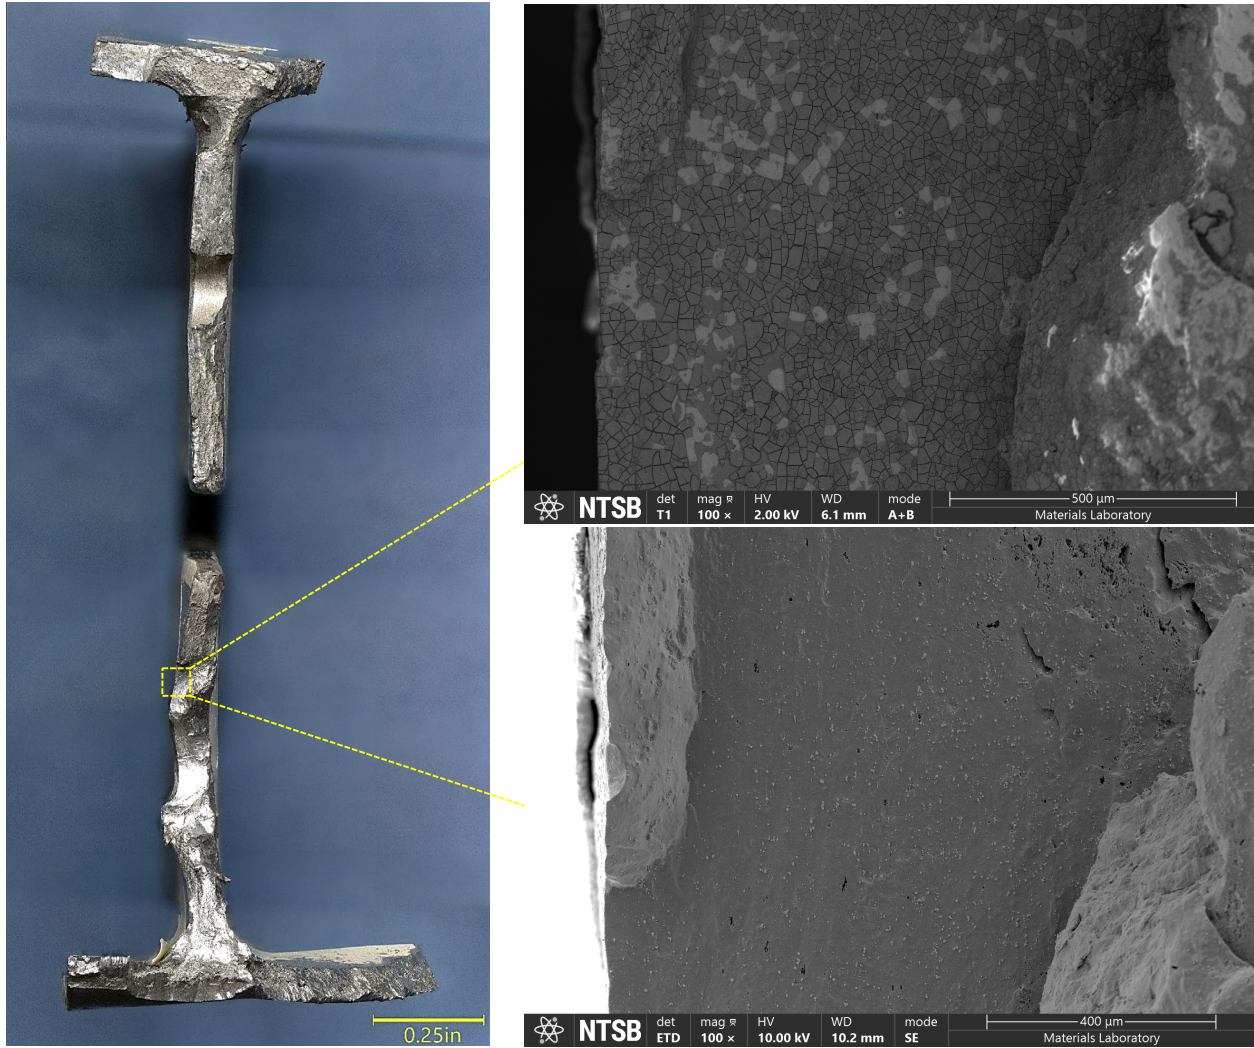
Scanning electron microscope images of a flatter region on the fracture surface of the lower main spar cap (outboard fracture location) before heated acid cleaning (upper right) showing a mudcracked surface consistent with a built up oxide layer from extended exposure to a marine environment. The lower right image shows the same area after heated acid cleaning and a relatively smooth and featureless appearance was observed on the fracture surface.
